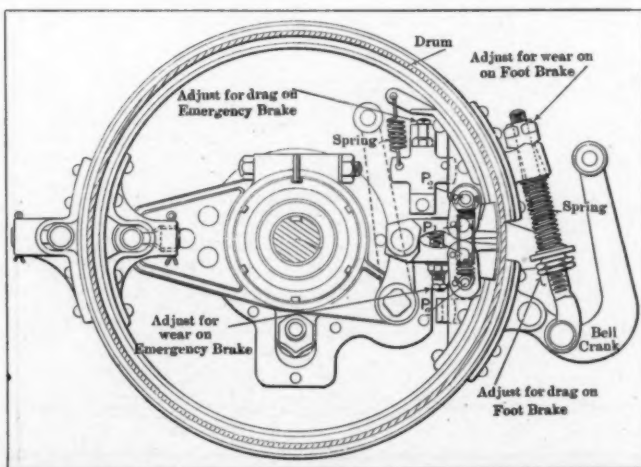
Longitudinal section through the brake, showing methods of adjustment
